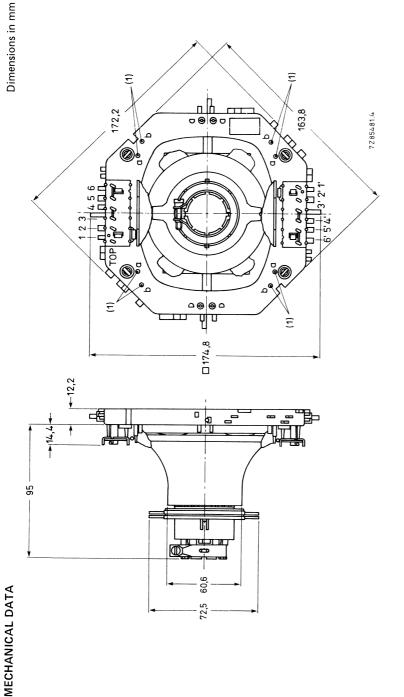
Deflection units AT1039/08 and AT1039/09.
